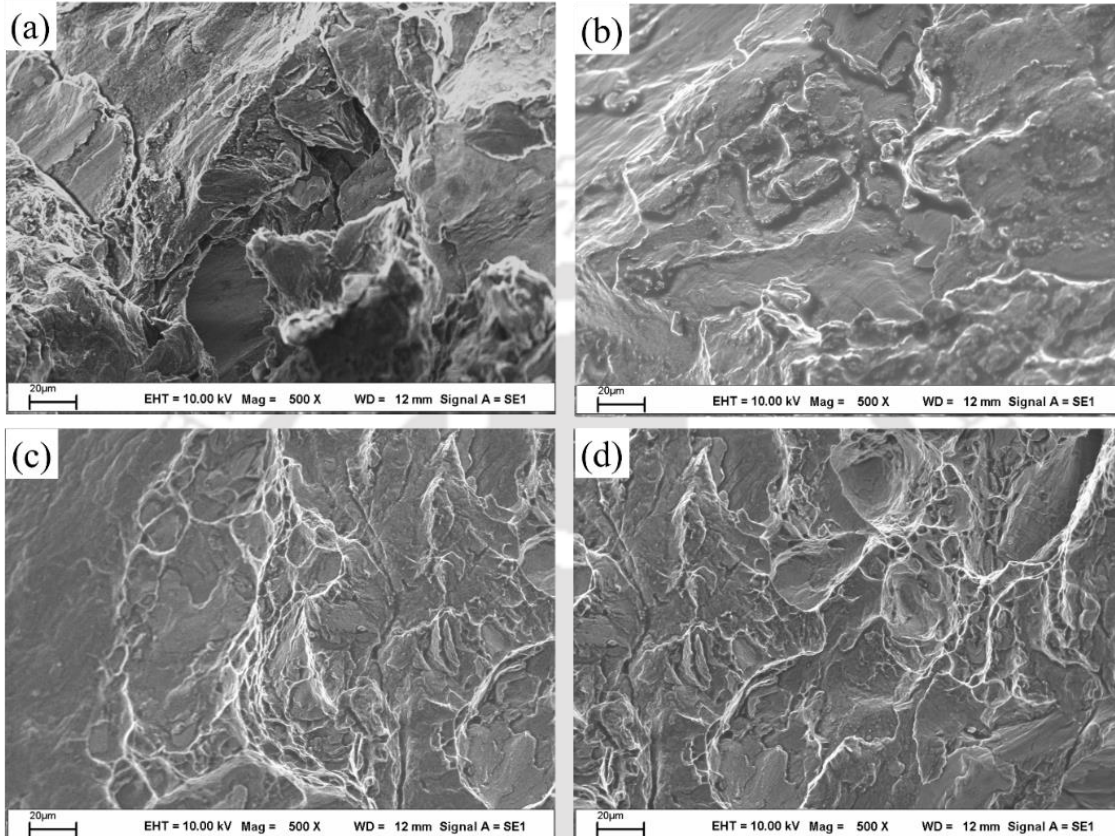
Fracture surface morphologies of joints in zone at tool offset (a) 0.0 mm, (b) 0.5 mm, (c) 1.25 mm and (d) 2.0 mm.
